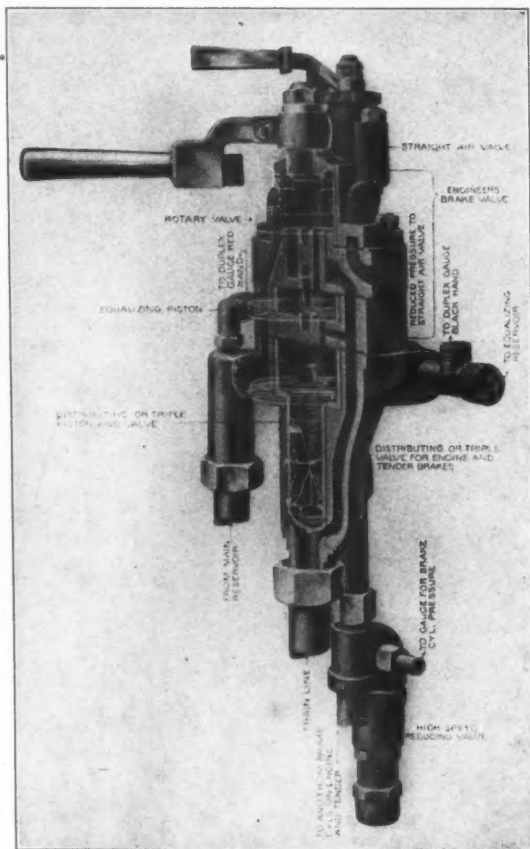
SECTION OF BRAKE VALVE IN RELEASE POSITION.
